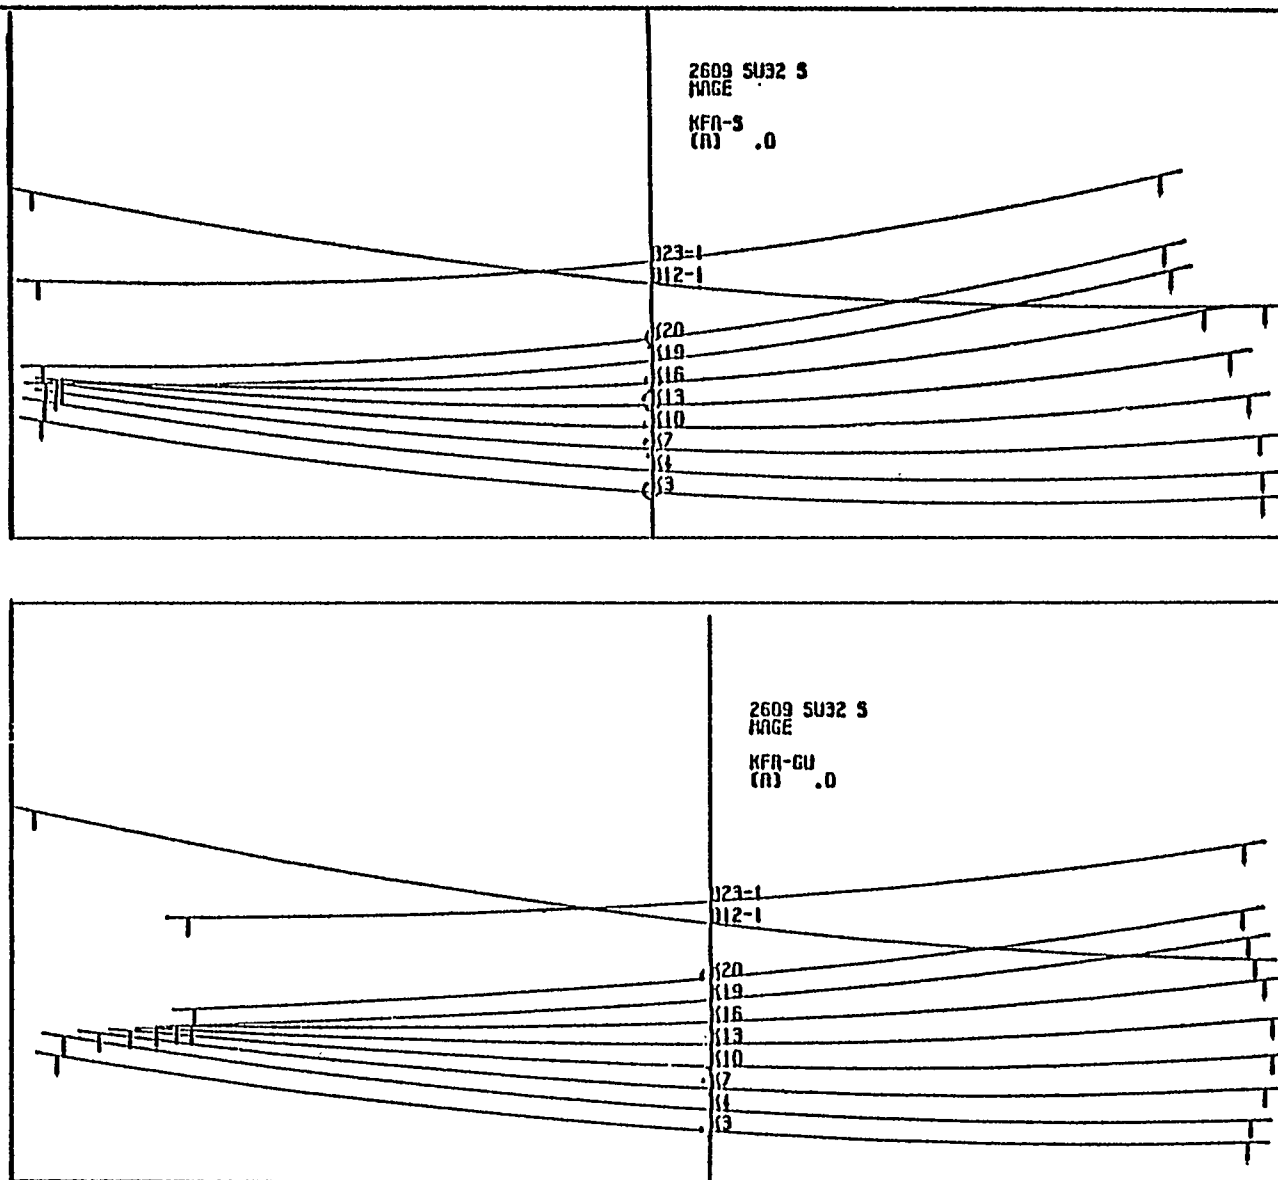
BENDING PLANS FOR STEEL PLATE
